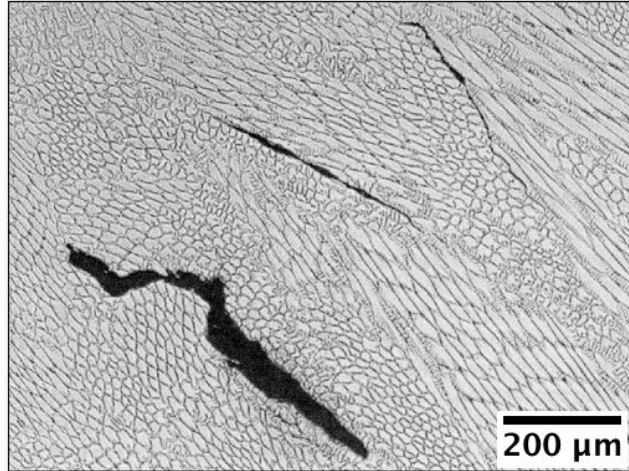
Weld solidification cracks in fully austenitic weld metal [86].
